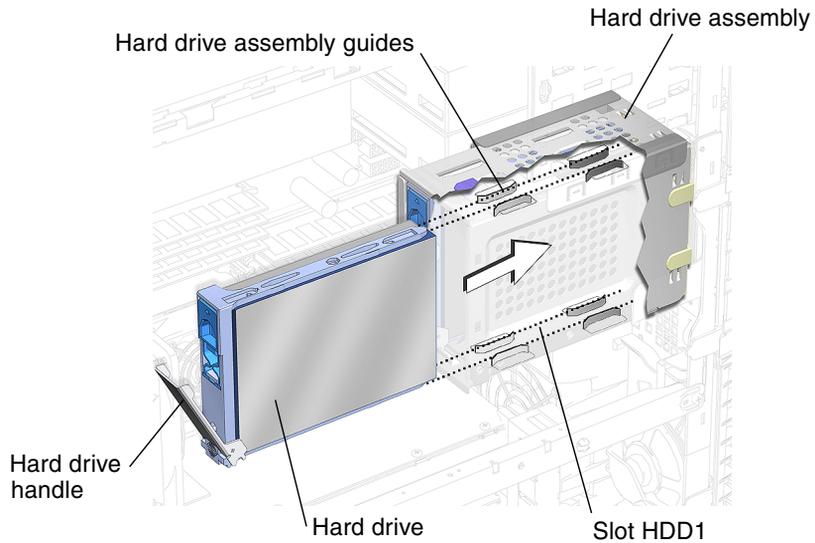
Installing the Hard Drive into the Hard Drive Assembly
